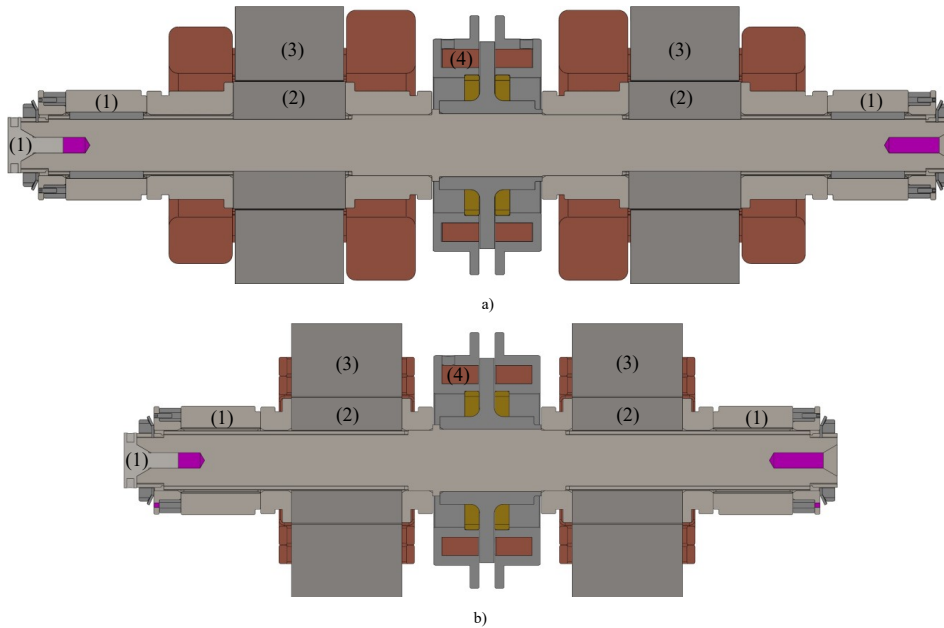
Cross-section view of the rotor and stator from the end point of the rotor. Upper drawing (a), shows a distributed wound machine. Torque producing windings are two-layers short pitched. Lower drawing (b), shows a tooth-coil wound machine. Both machines use the same rotor structure with embedded magnets.
